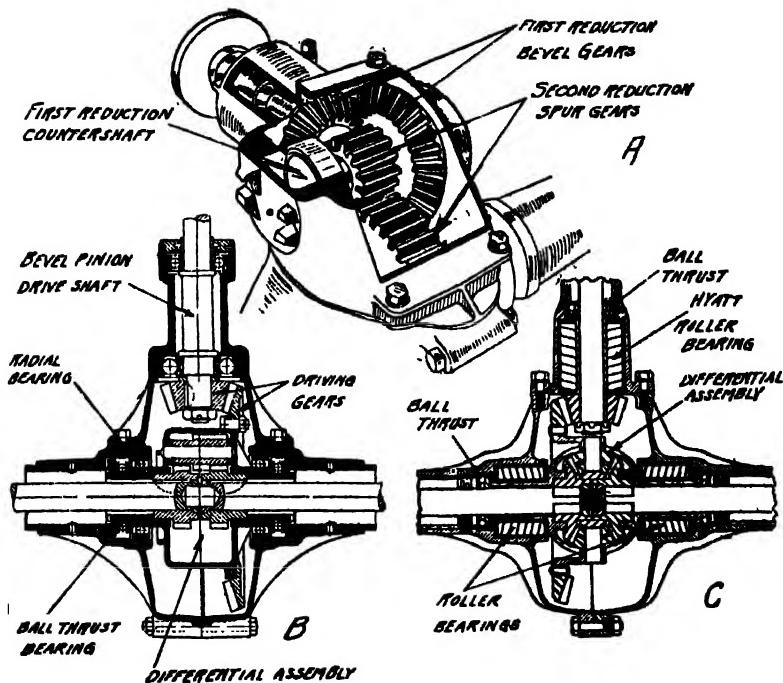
Showing Construction of Non-Adjustable Bevel Gear Drive Units.
